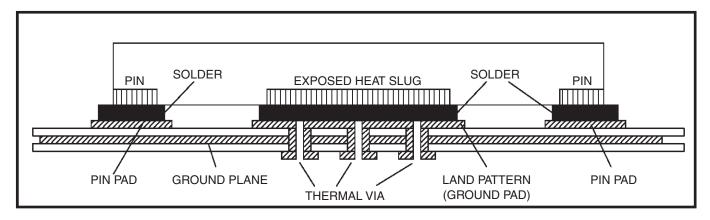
P.C.ASSEMBLY FOR EXPOSED PAD THERMAL RELEASE PATH —SIDE VIEW (DRAWING NOT TO SCALE)
